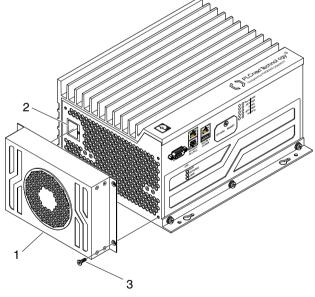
Removing the BPC 9102 FAN KIT fan kit
